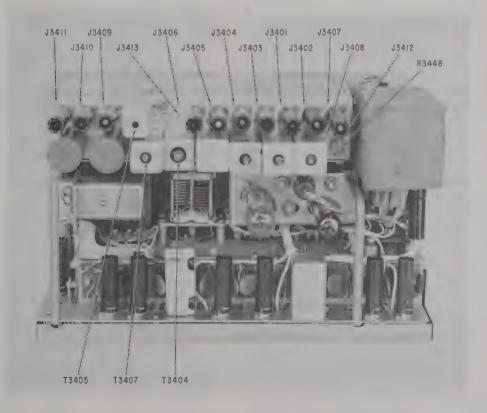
Channelizer Subassembly, Test and Alinement Points
